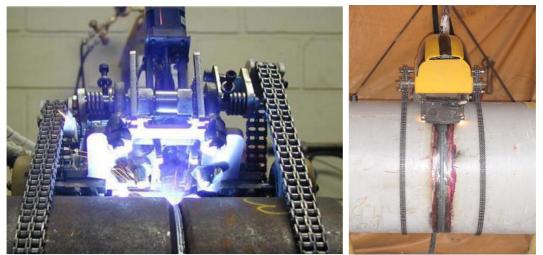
The first version test of the robot for orbital welding and the second version, operating in Petrobras refinery.
